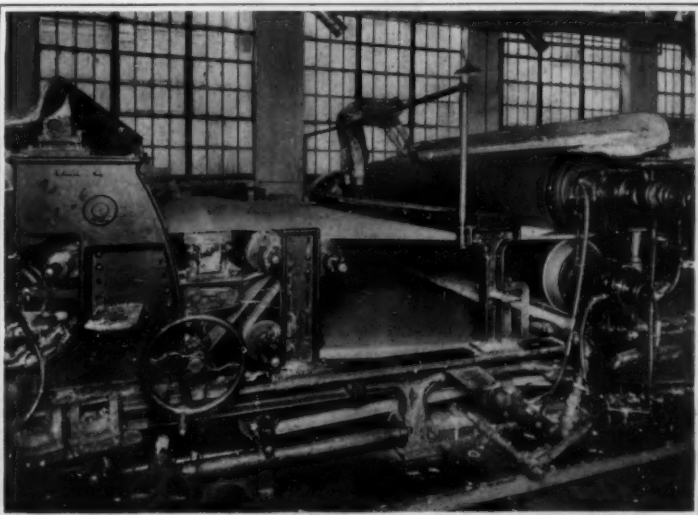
At this point the paper begins to form on the Fourdrinier machine. The machine attendant is fussing over the "doctor," which scrapes the roll.
